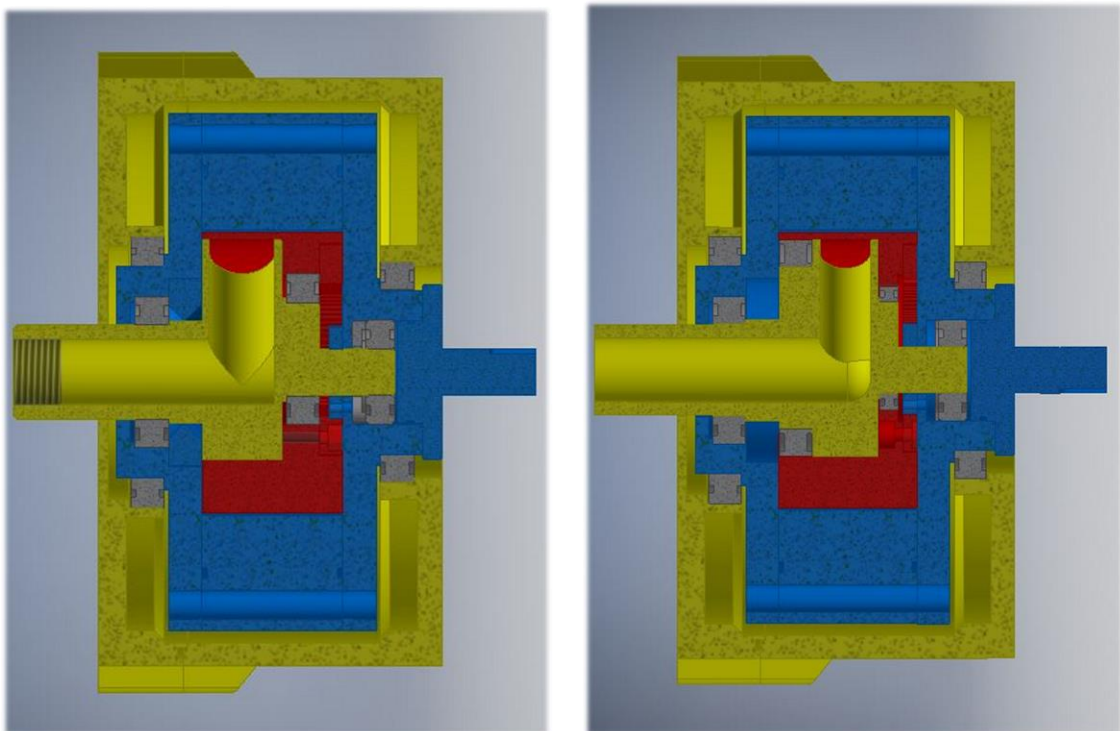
First prototype (left) and second prototype (right) CAD assemblies
